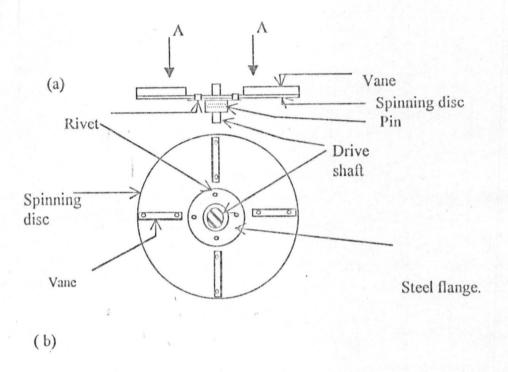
Spinning disc showing (a) Pin Joint and (b) Rivet Joint
